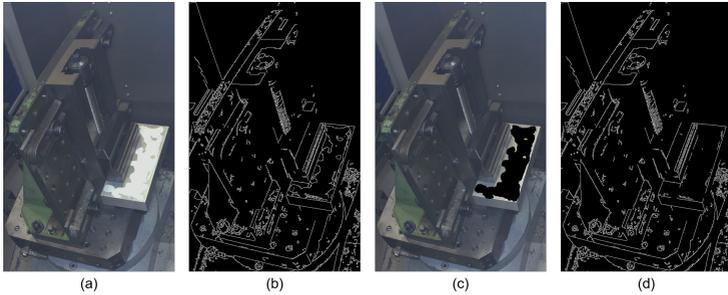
Removal of additional edges due to coolant. (a) Original image with coolant; (b) Edges detected in original image; (c) Coolant identified and marked in black; (d) Image after removal of edges due to coolant.
